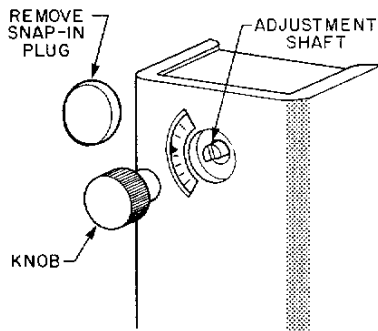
Drawing showing snap-in plug removed and the knob in line to assemble. Press the knob onto the slotted shaft.
